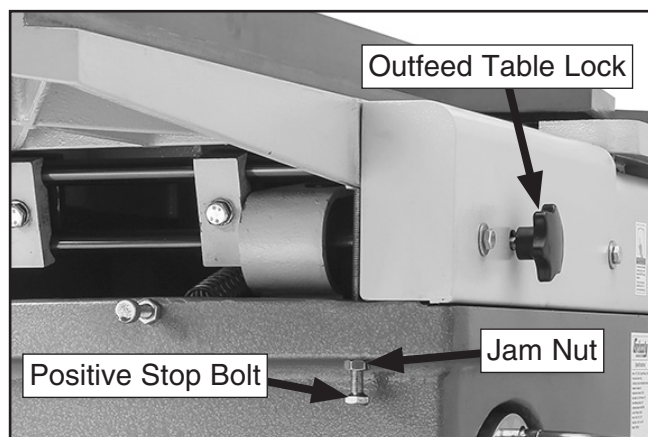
Location of outfeed table lock, positive stop bolt, and jam nut.
